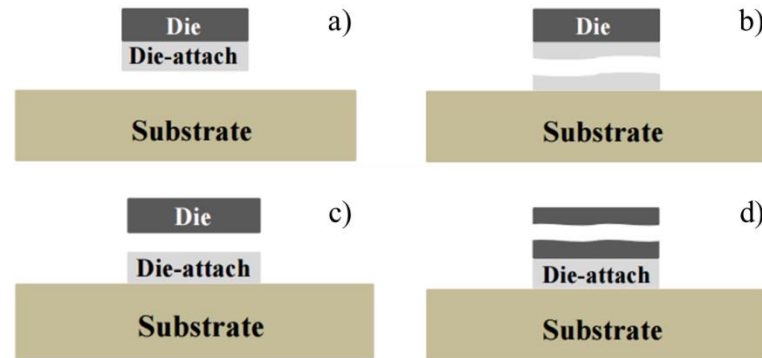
Modified fracture modes of die attachments in power electronic packaging [2.139].
